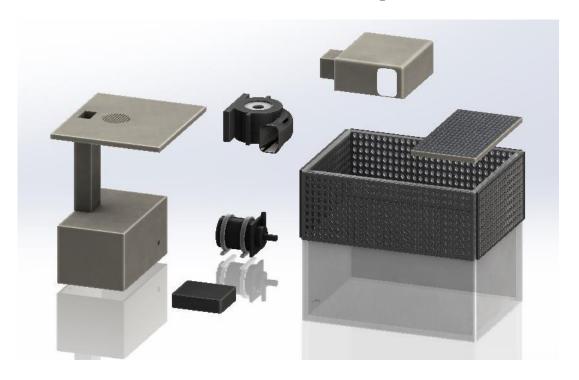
Reservoir with Humidifier and Control box (Exploded view)
